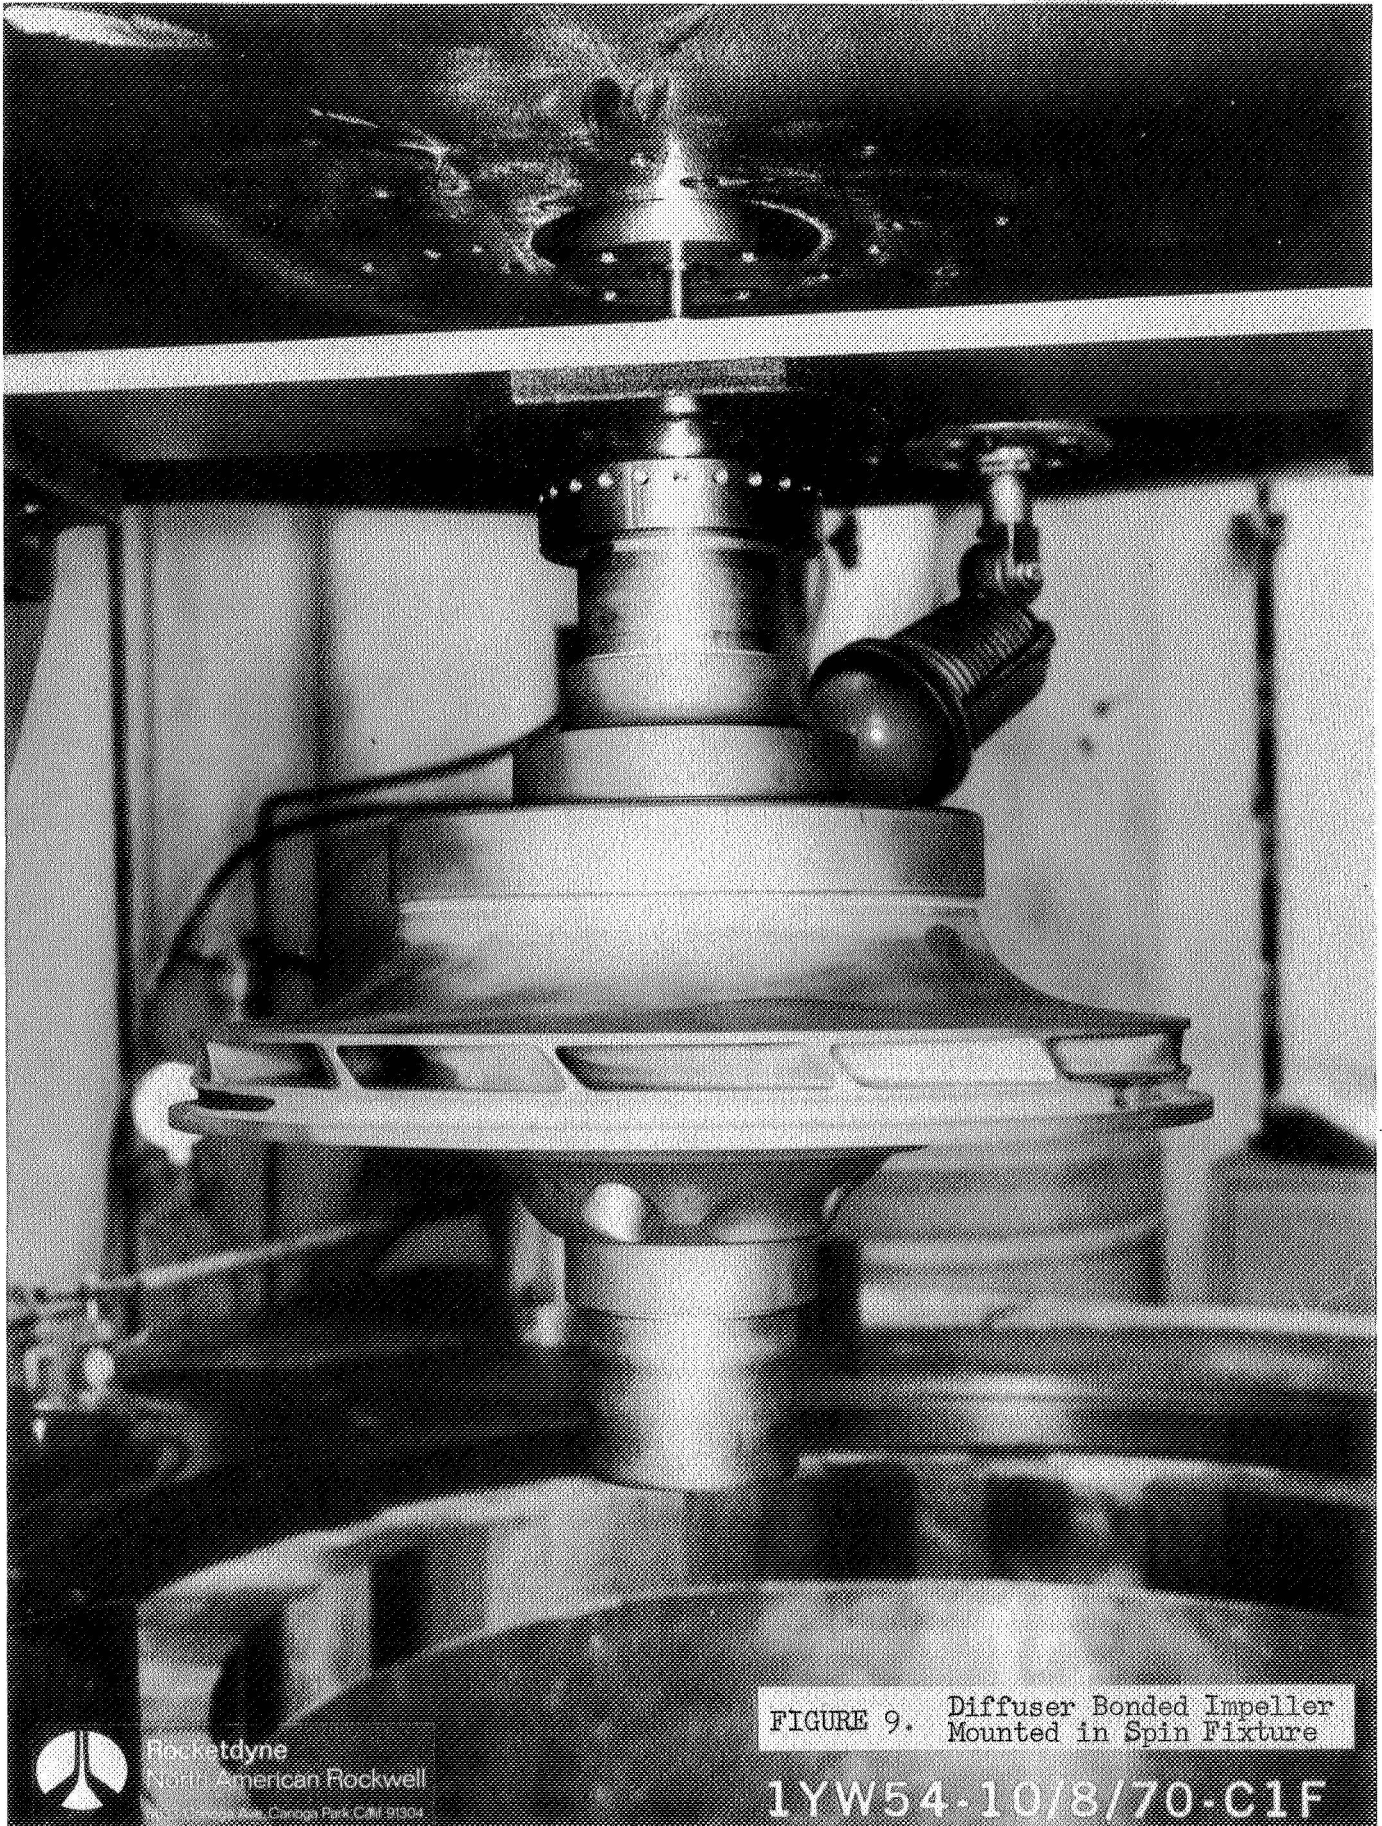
Diffuser Bonded Impeller Mounted in Spin Fixture
